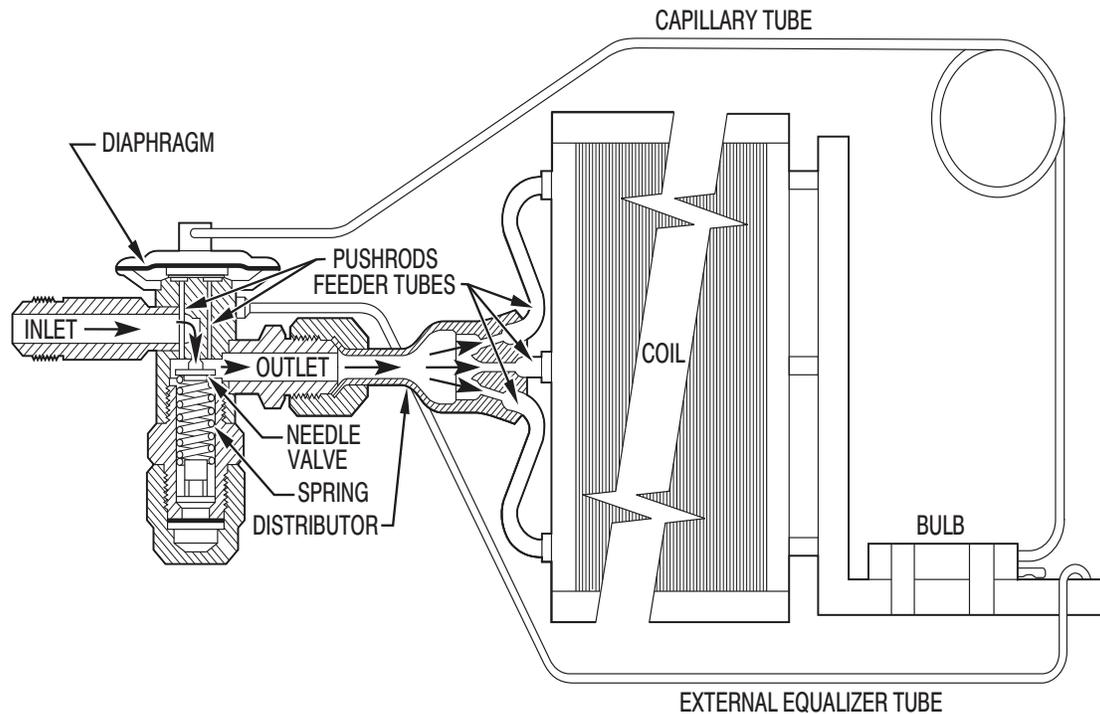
Thermostatic Expansion Valve (TXV) Operation
